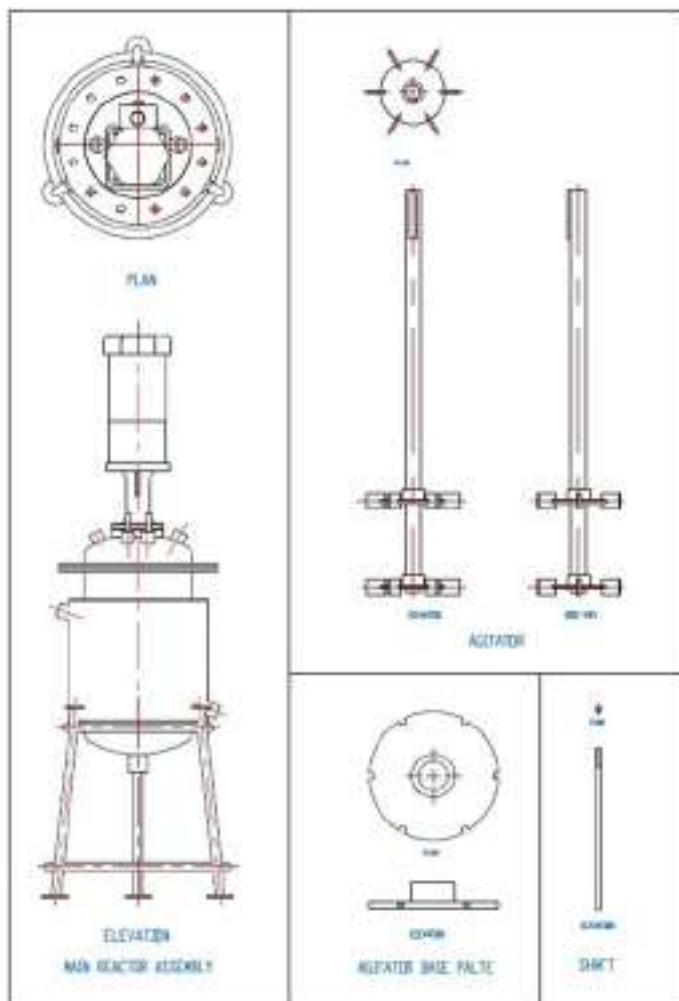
Technical drawings-1 of each part with the assembly of batch reactor of laboratory scale
